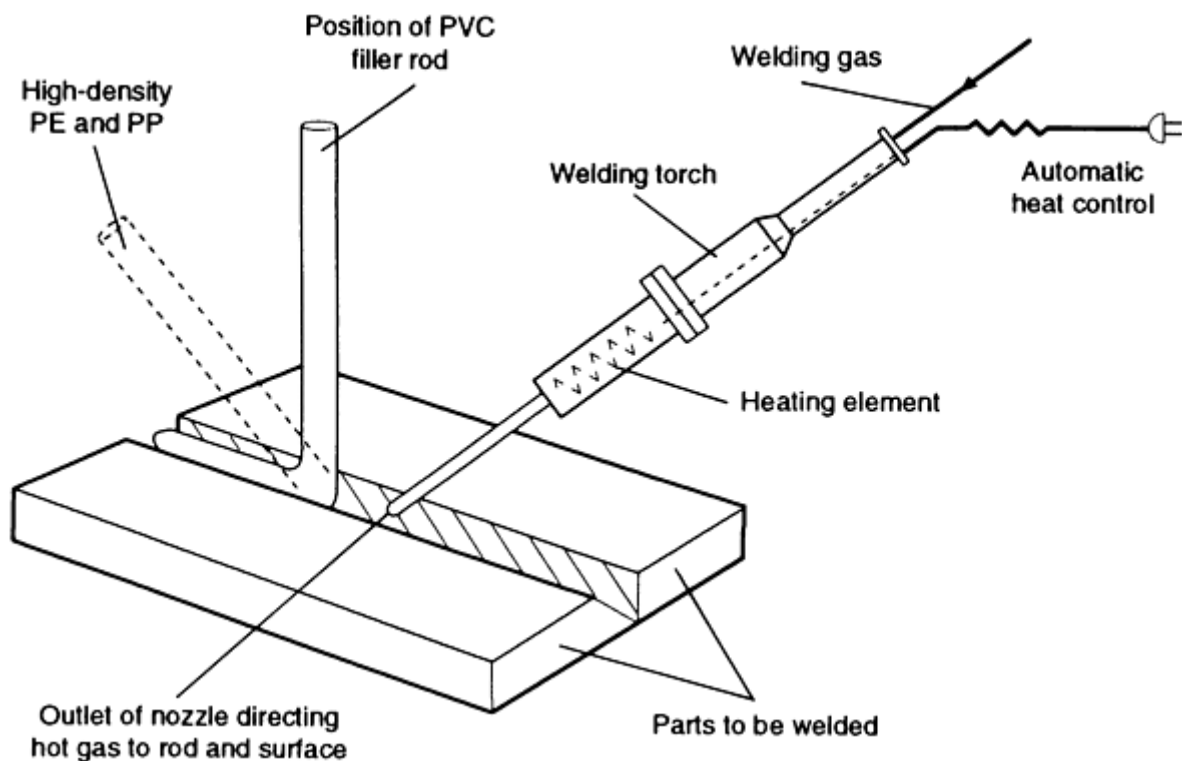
SCHEMATIC OF HOT-GAS WELDING, SHOWING THE CORRECT POSITION OF TORCH AND FILLER ROD FOR DIFFERENT THERMOPLASTICS. SOURCE: REF 19
